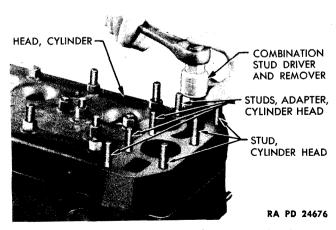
Removing Or Installing Cylinder Head Adapter Studs
